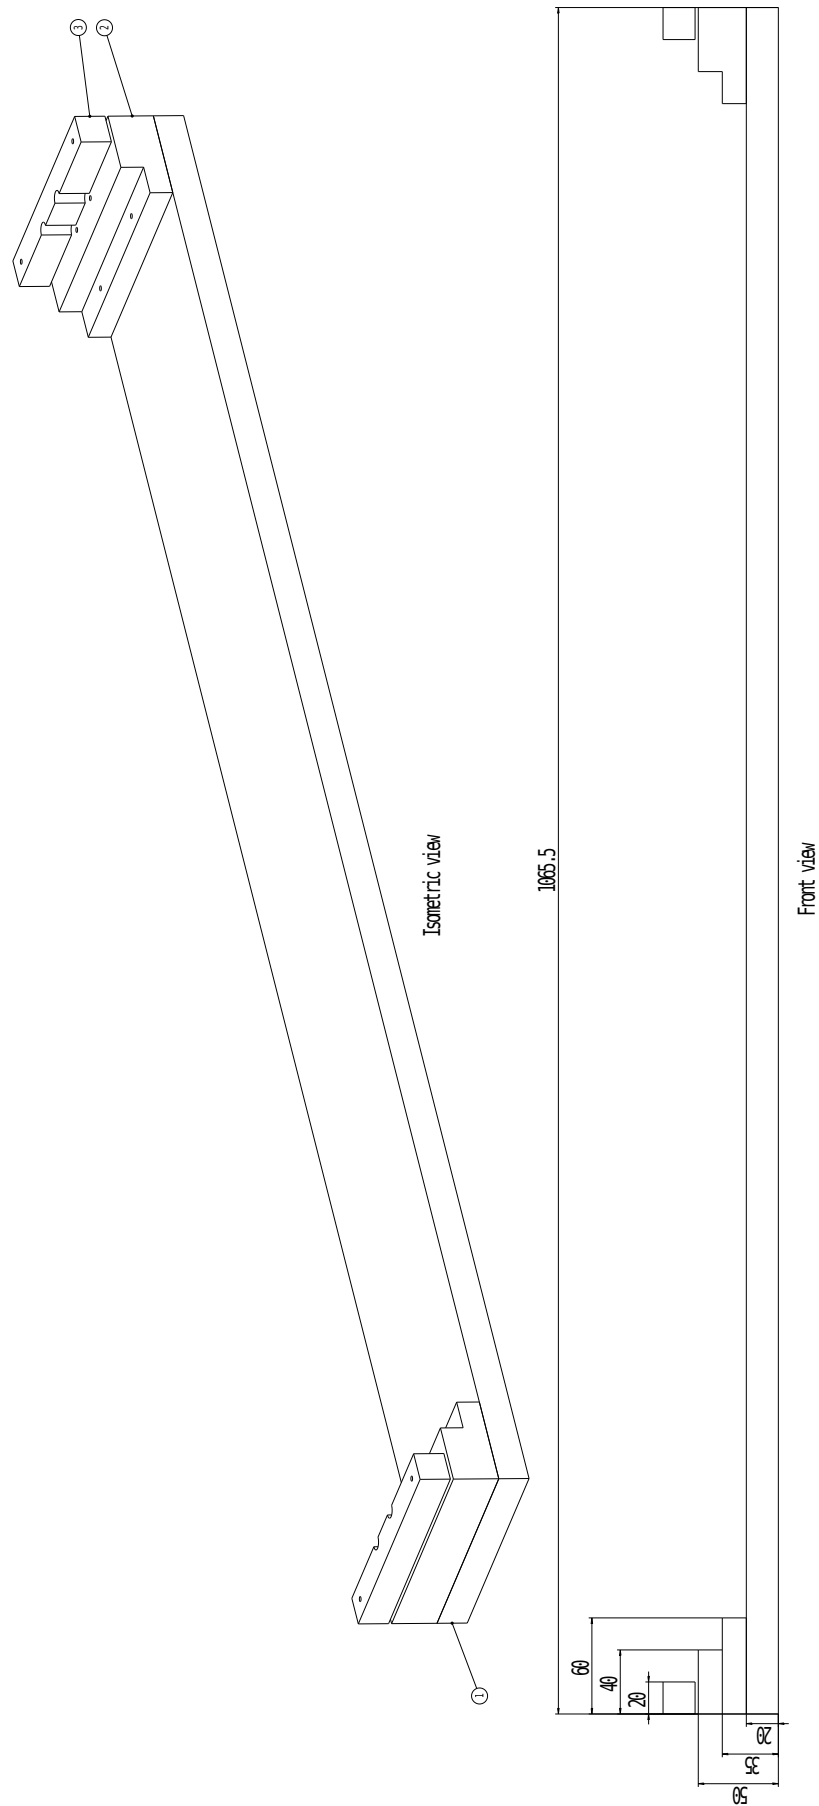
Technical drawings of the fixture for the component level validation experiments.
